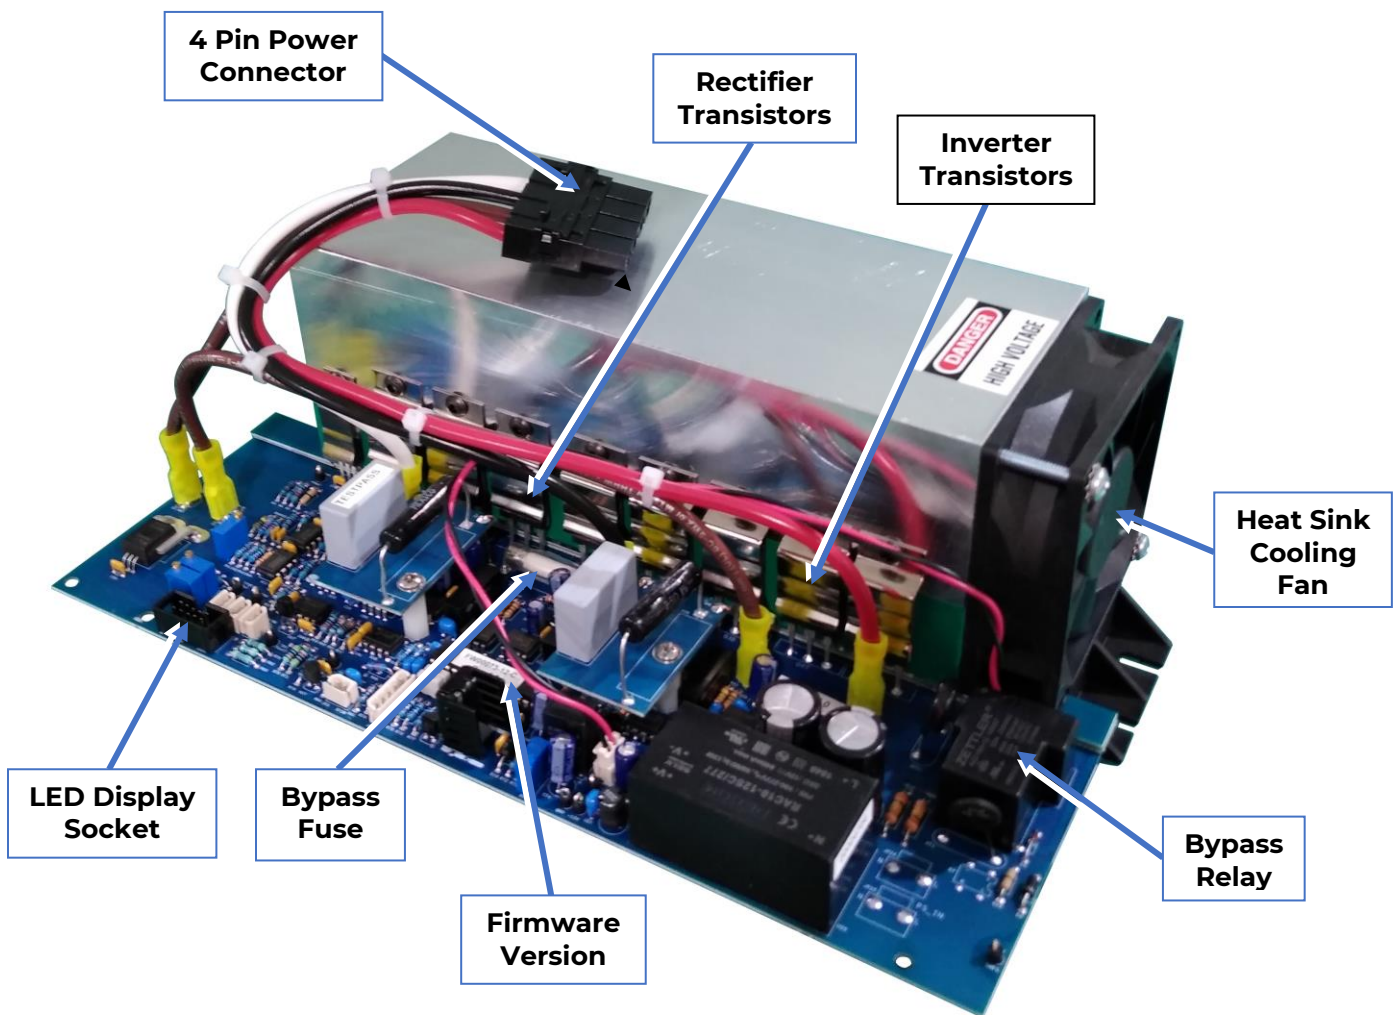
PZ00073 Main Control Circuit Board Assembly Shown
